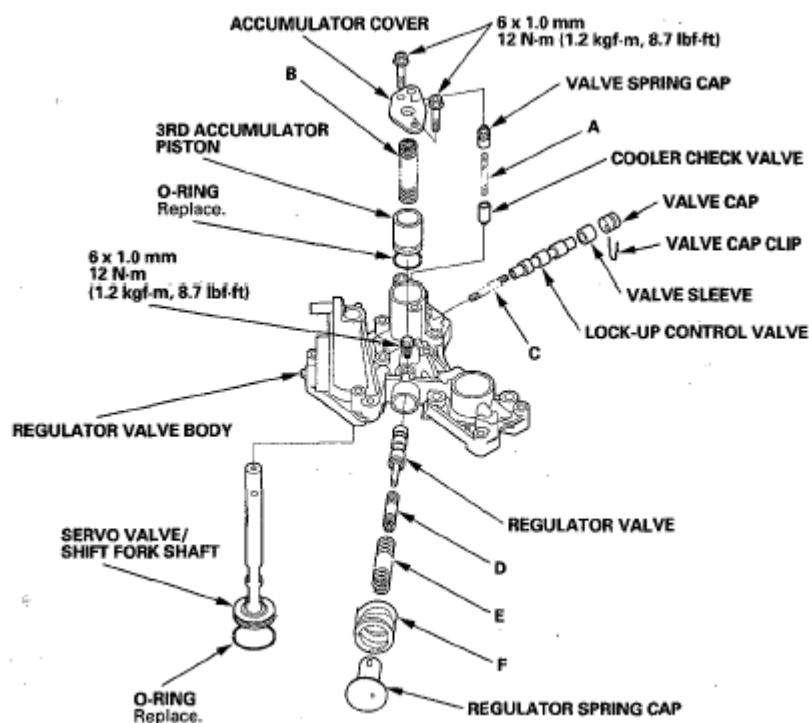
Identifying Regulator Valve Body (06-08 Model) With Torque Specifications
